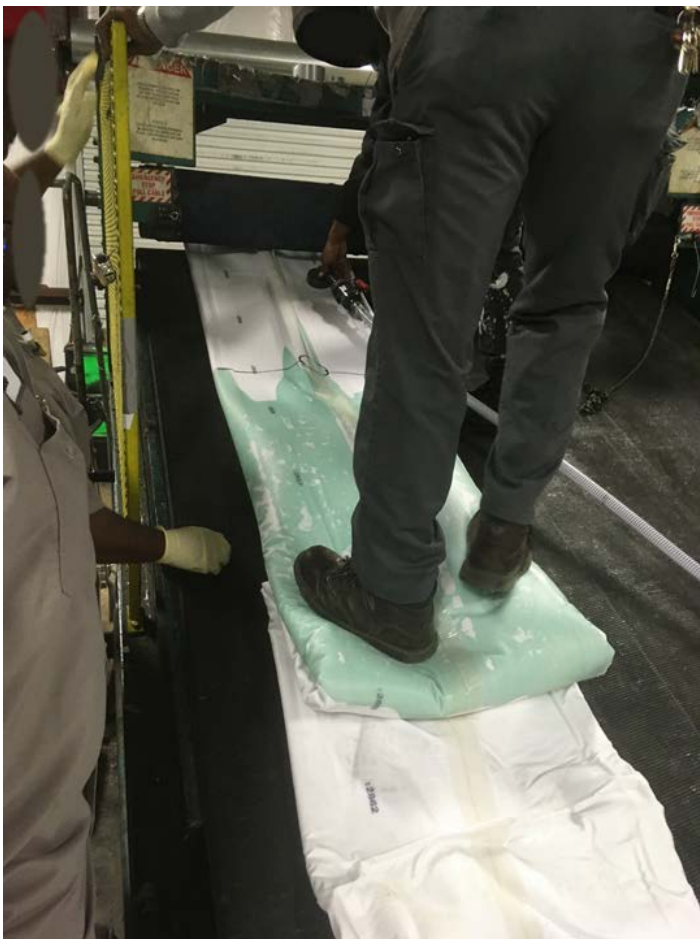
Employee at wet-out facility using body weight to spread resin mixture in liner and holding vacuum tube with right hand, December 2019. Photo by NIOSH.
